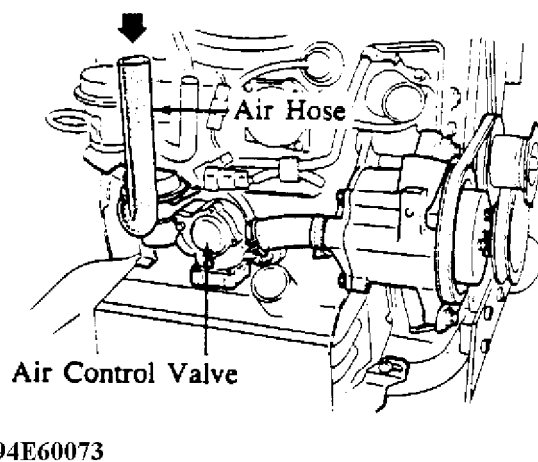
Disconnecting Air Hose Between Air Cleaner and ACV
